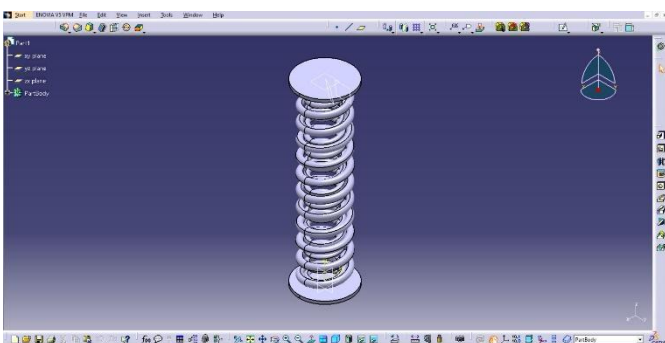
3-D Model of Double Coil Helical Spring
